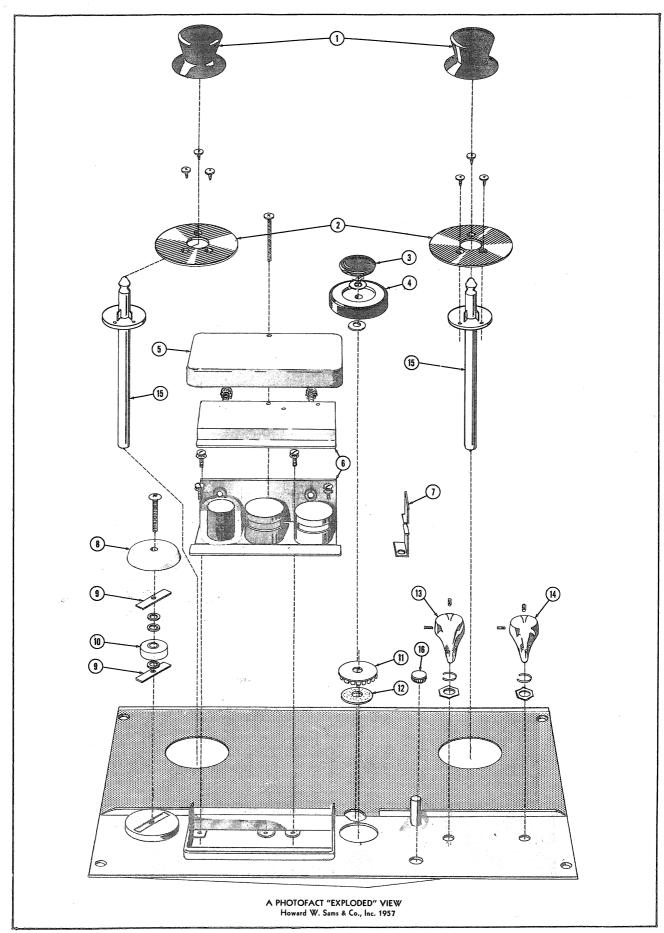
A. EXPLODED VIEW OF PARTS ABOVE BASEPLATE.
